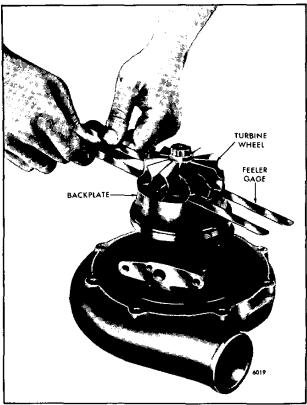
Checking Turbine Wheel to Backplate Clearance
